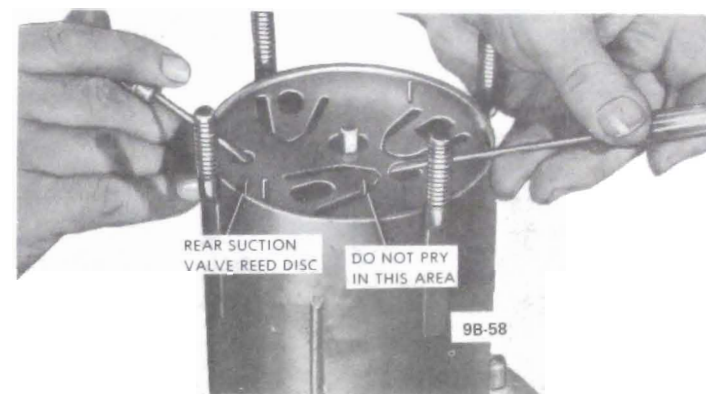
B-66 Removing Rear Suction Valve Reed Disc
